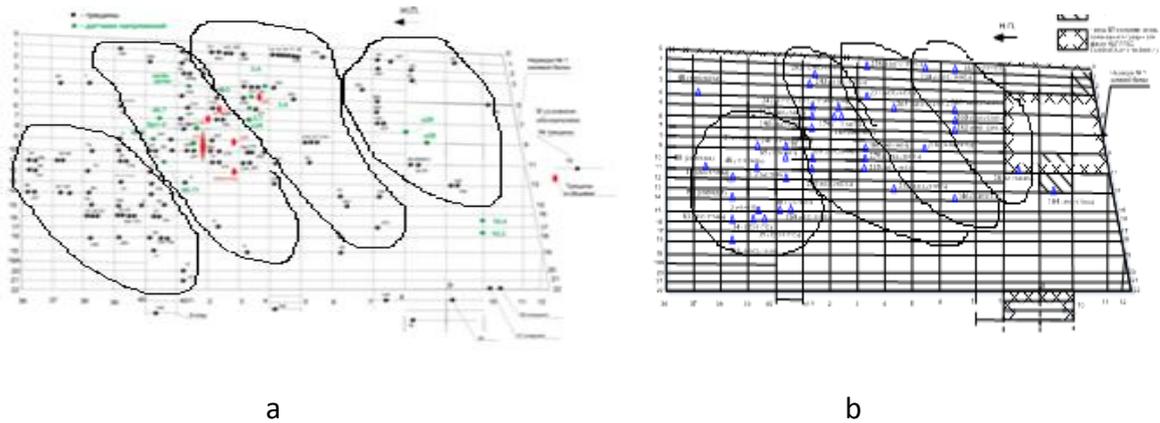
Fatigue on Tail Beam of Mil-26 helicopter: a) – general scheme of all cracks on the right board (inside view), b) – scheme of dangerous fatigue cracks
